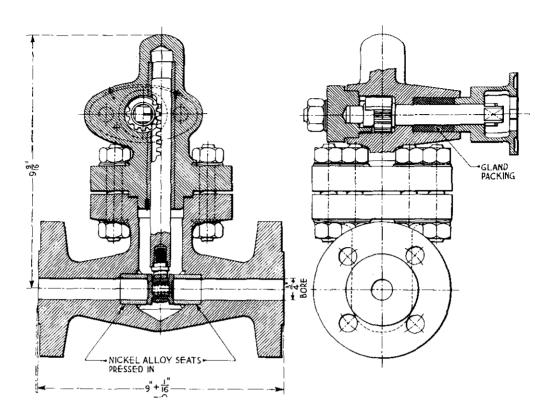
RACK-OPERATED PARALLEL SLIDE VALVE
